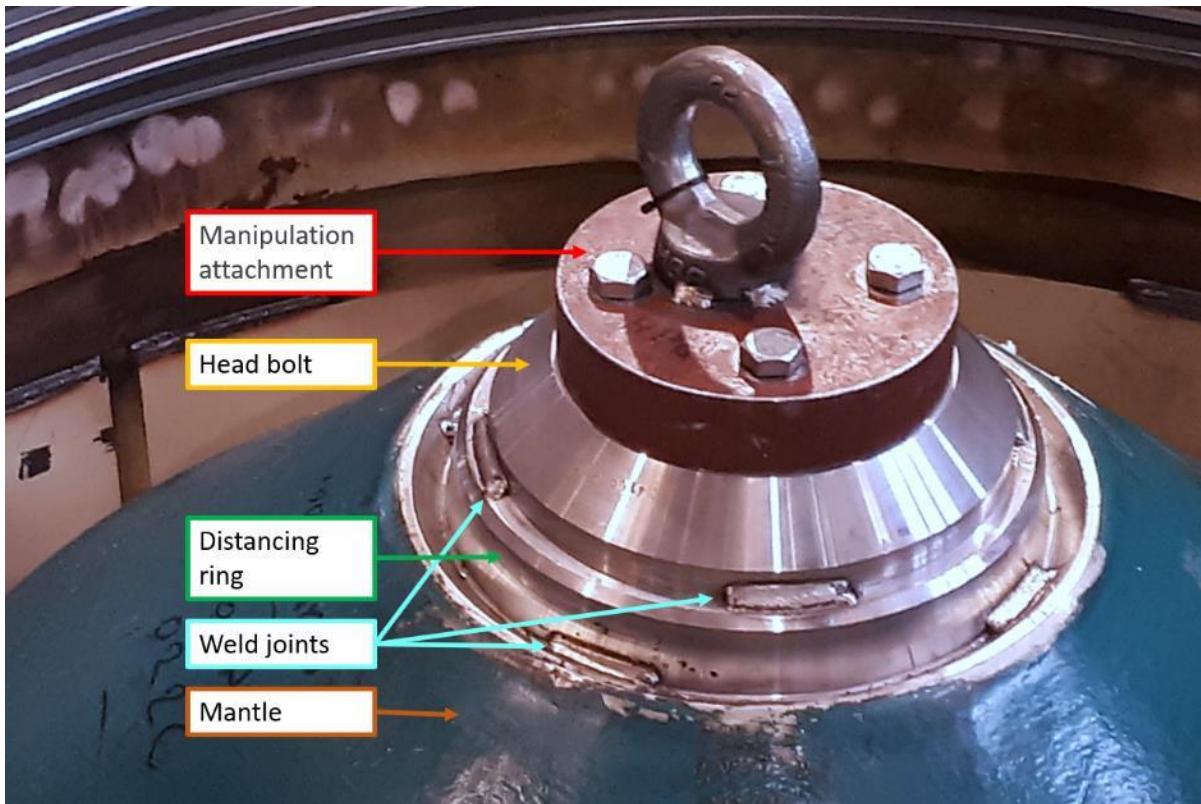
Head bolt placement during assembly of the cone crusher with manipulation attachment in place.
